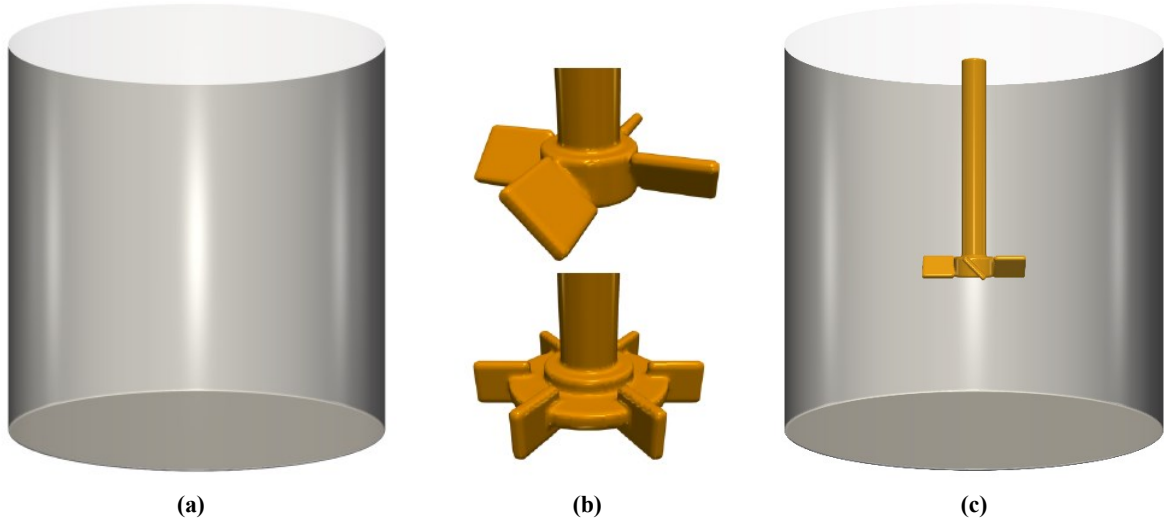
Numerical construction of all parts of the mixing system: (a) the cylindrical tank, (b) PBT and RT impellers (both $D = 0.041$ m) and (c) an example of a single-impeller mixing system, equipped with a PBT impeller.
